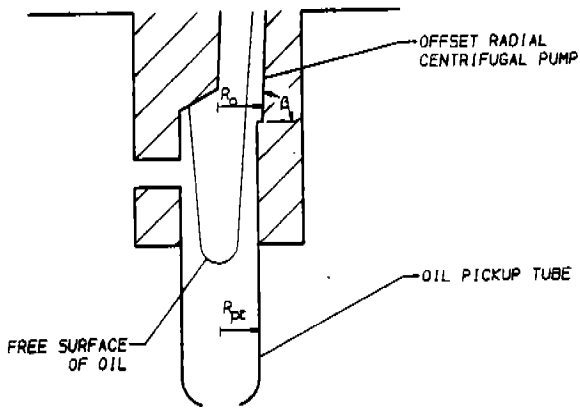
Oil Pickup Tube Showing the Free Surface of the Oil.
